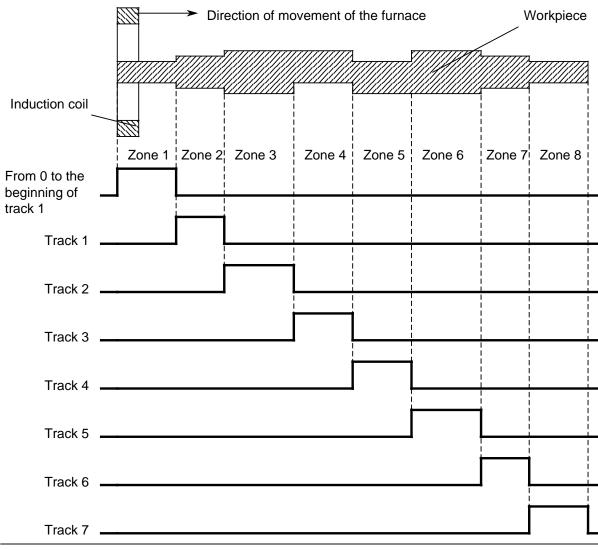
Assignment of the Zones of a Workpiece to Tracks
